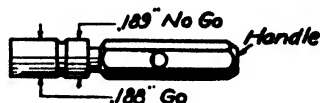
Taper Insert Progressive Limit Plug Gage.
